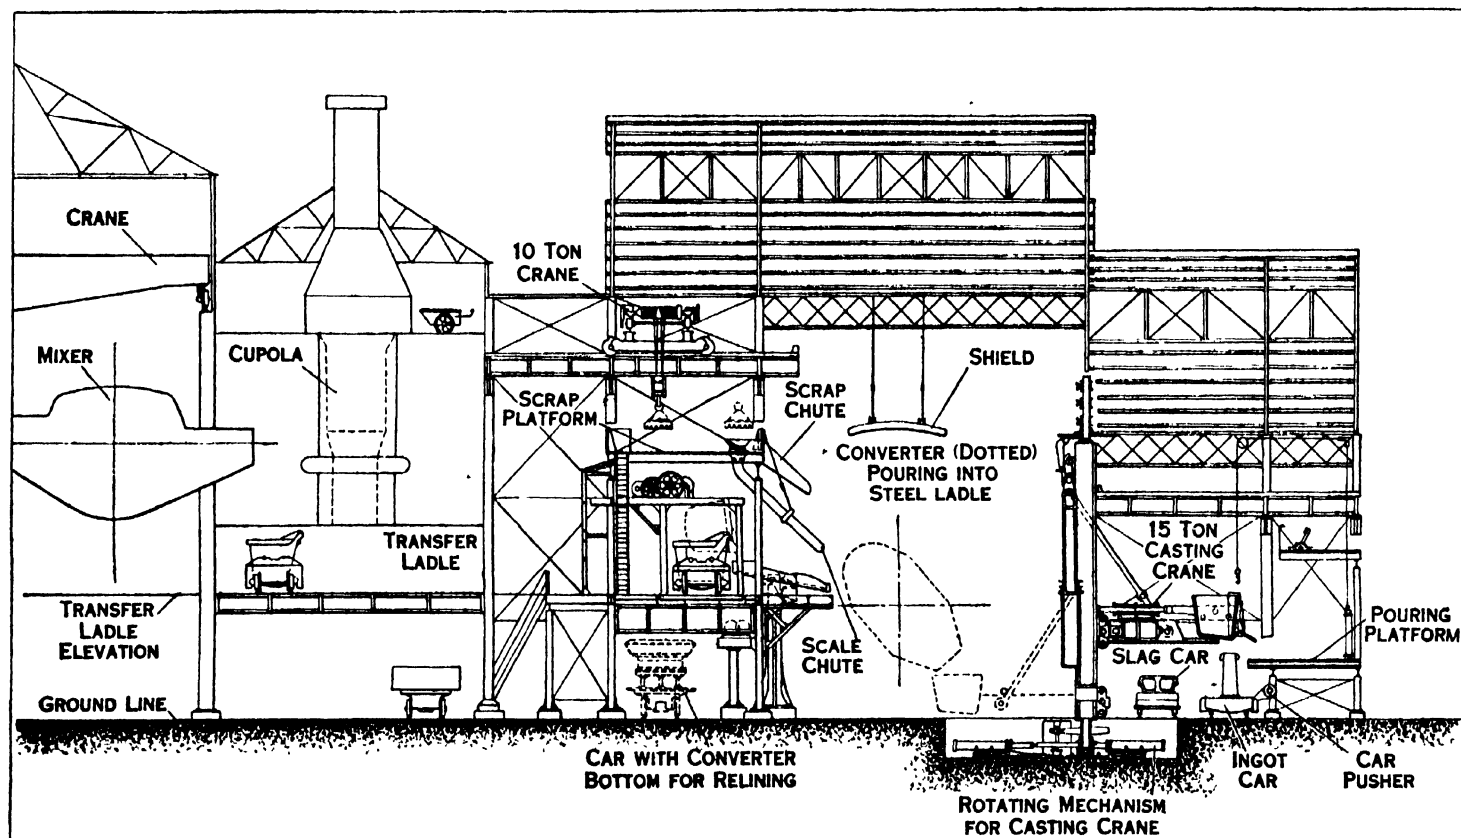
GENERAL CROSS SECTION OF CONVERTER HOUSE
